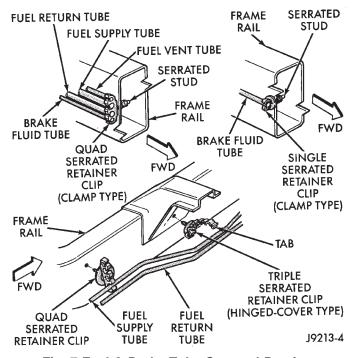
Fuel & Brake Tube Serrated Retainer Clips—Typical
